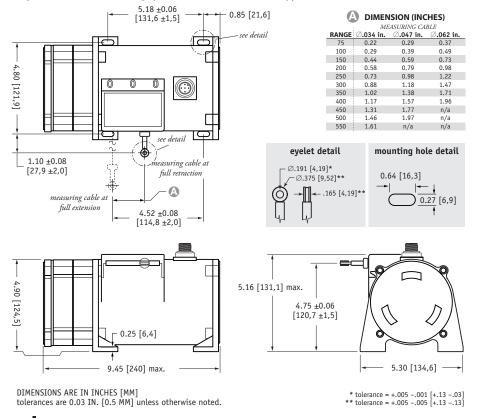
Outline Drawing (52 oz. cable tension only)
